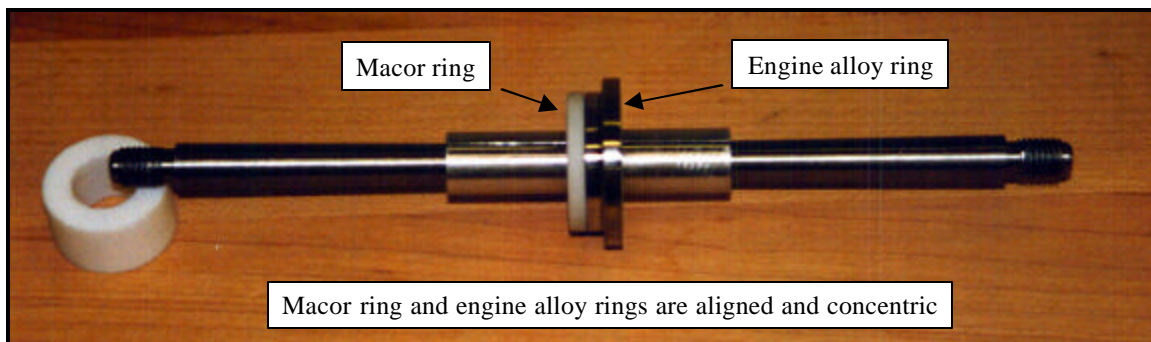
In this figure the RECHII alignment gage is shown with a RECHII insert being assembled.
